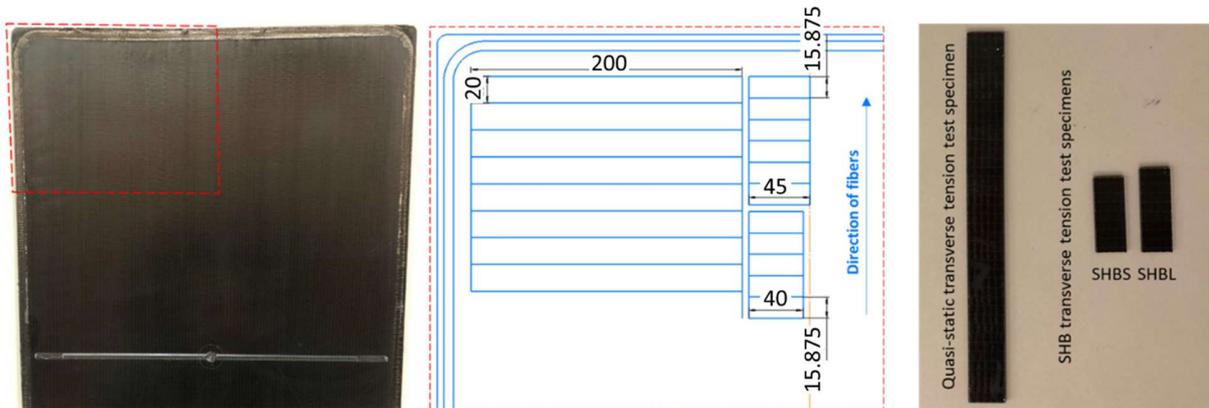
Dimensions and cutting directions of the specimens with respect to the panel (left) and manufactured specimens for mechanical testing (right)
